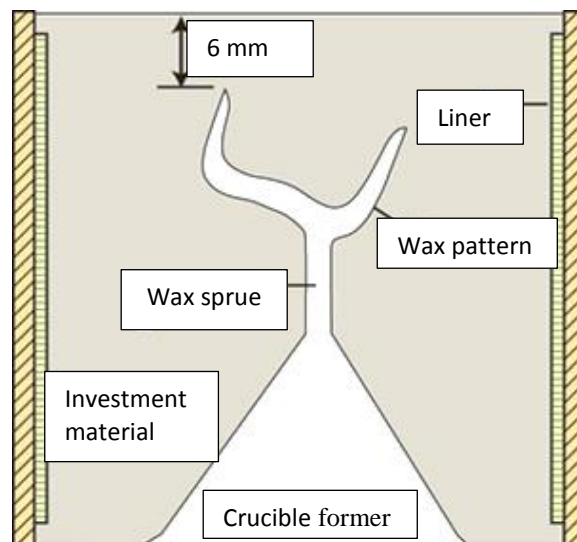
Schematic representation of a dental investment casting mould [10]
